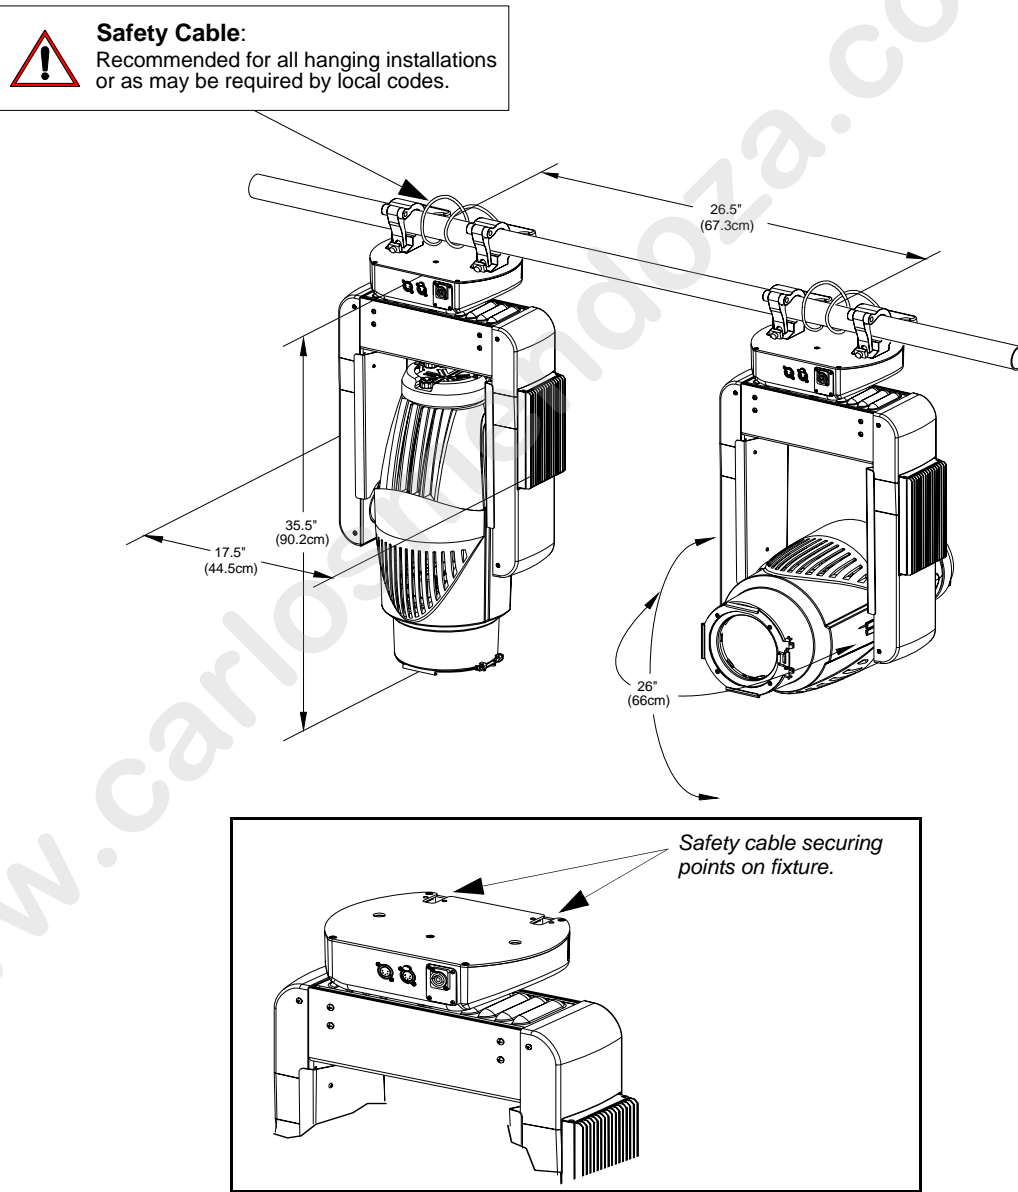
Example VL1100CD Luminaire Truss Hook Installation
